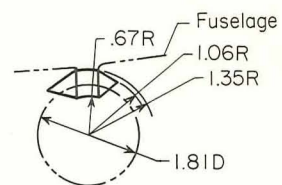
Dimensional details of the speed brakes. All dimensions are in inches unless otherwise noted.
